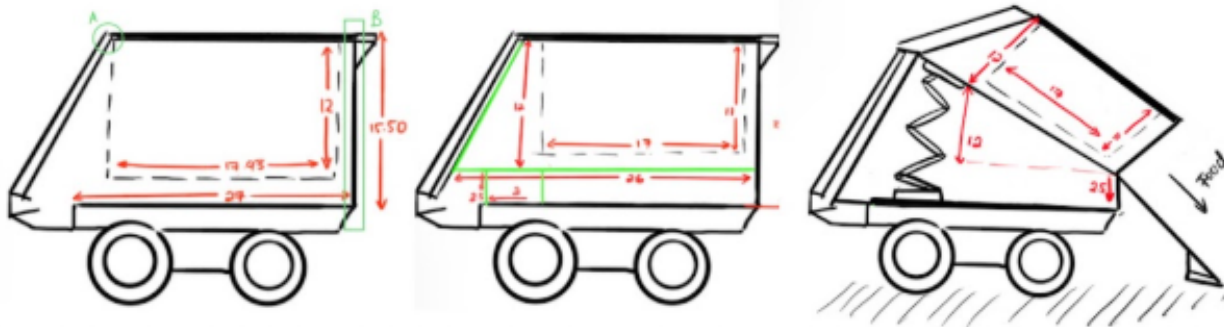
Original Dimensions Figure 7: Modified Dimensions Figure 8: Accessory Dimensions
